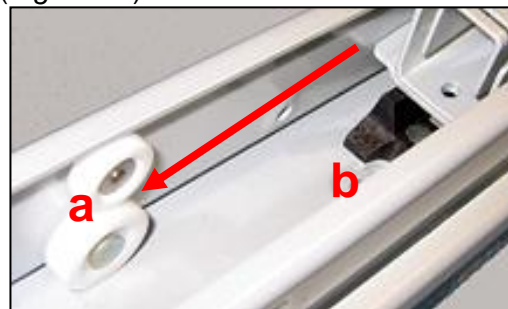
Insert the ears on bottom drawer glide into roller guides (a); lift drawer to clear the stop, (b).
